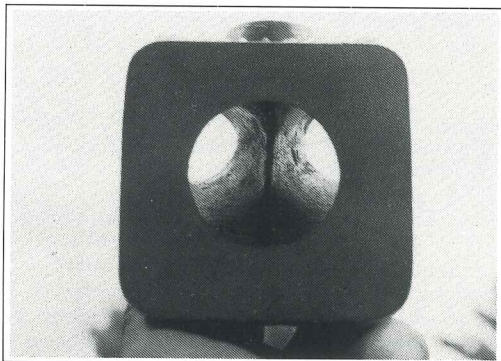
The view the carb sees of the 2 inlet ports (prior to removing casting marks).
